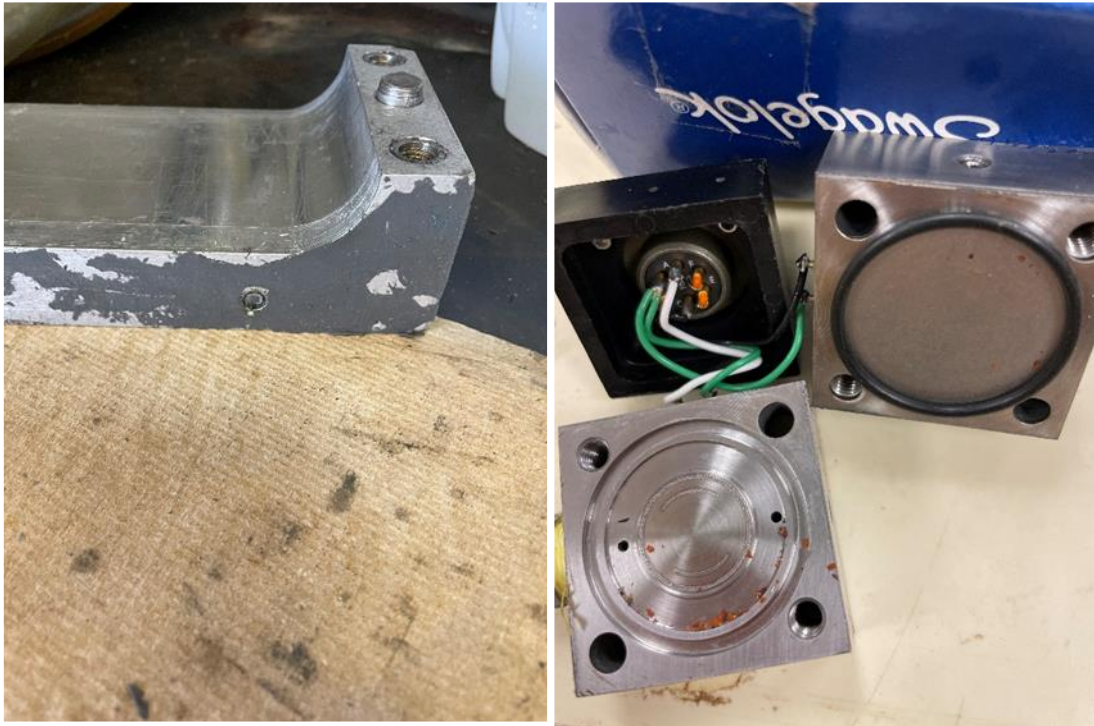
Left - Sheared bolt from the aluminum epoxy mold. Right - Rust and debris inside a pressure transducer.
